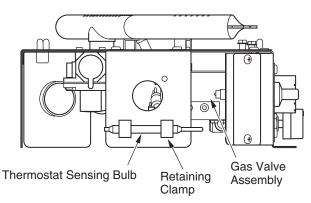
Location of Gas Valve Assembly and Thermostat Sensing Bulb
